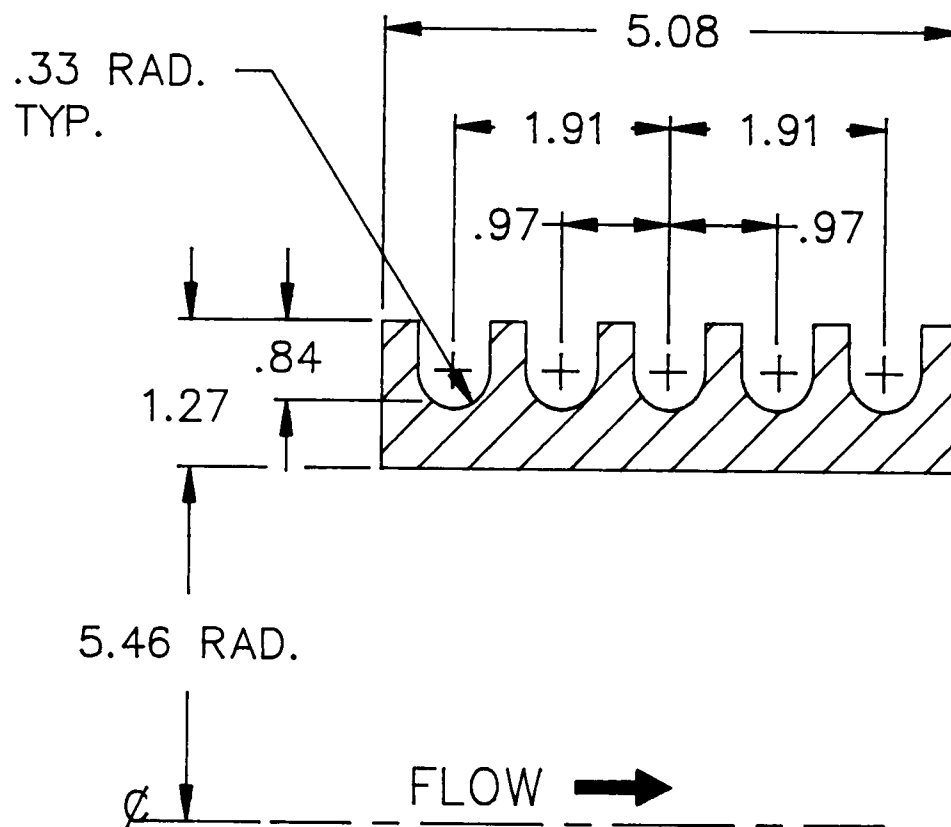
Cross-Section of Inner Throat Ring of Nozzle
